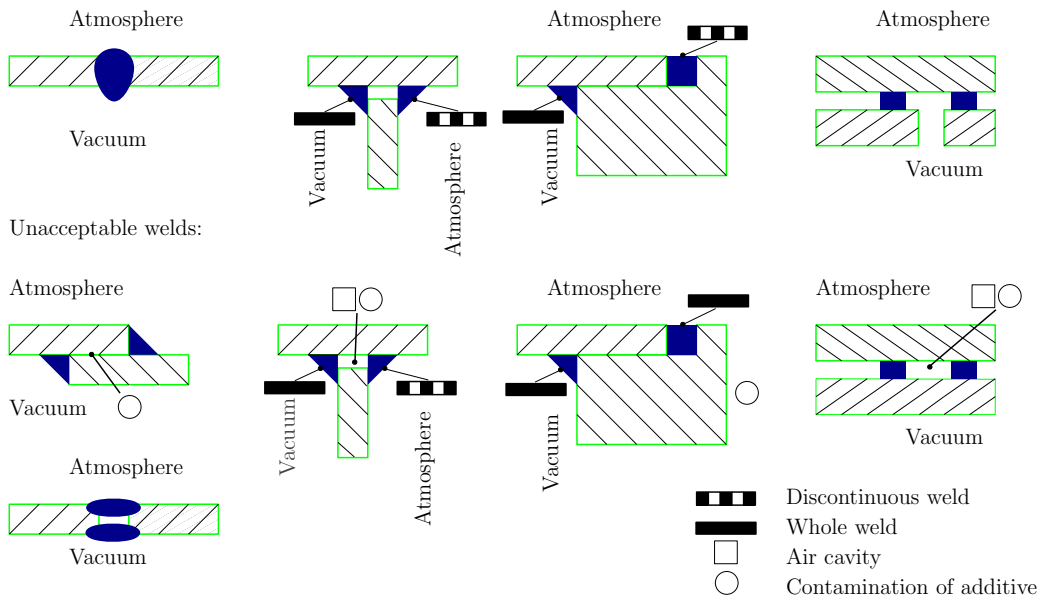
The cases of vacuum acceptable and unacceptable welds. Taken from [35].
